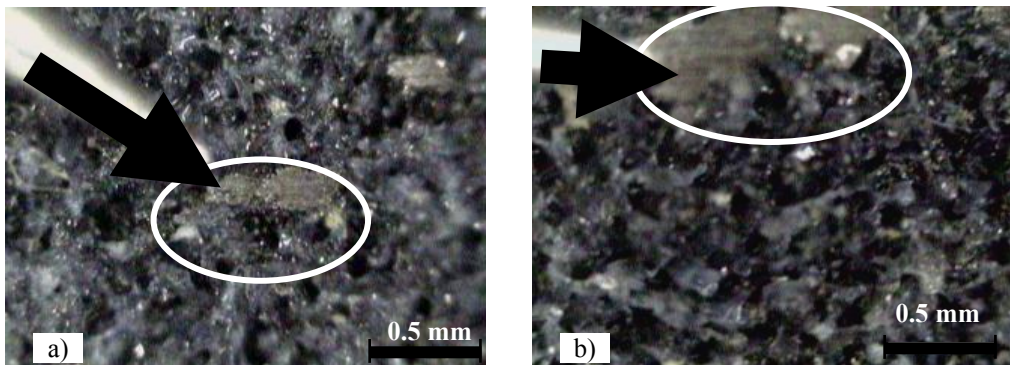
Wheel pictures showing the filled porosities with workpiece material at 0.04 mm depth of cut for the grinding wheel of 80 grain
